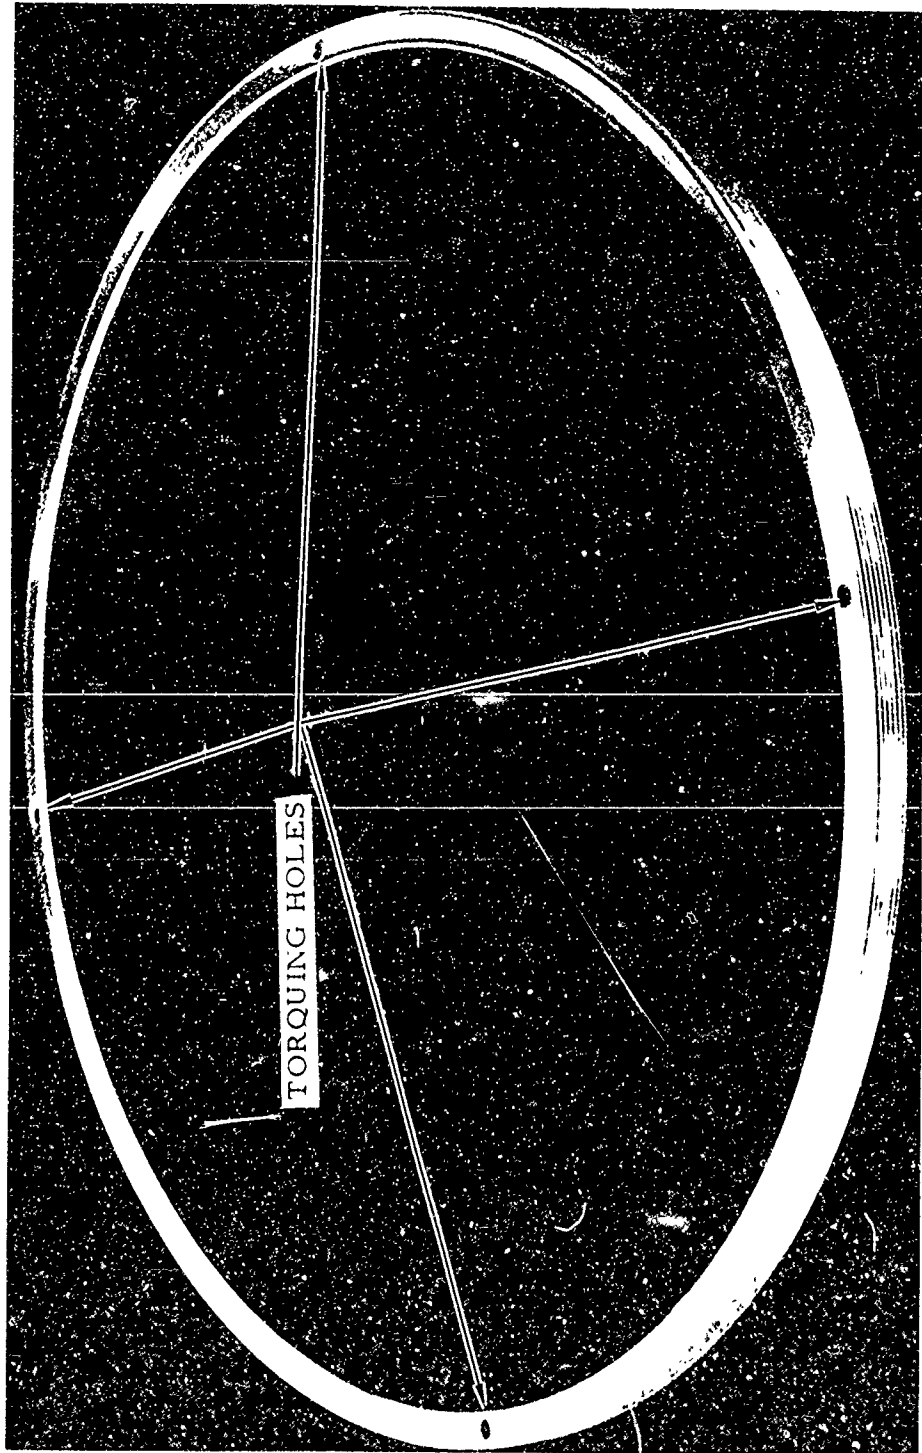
Typical Solar Cell Plaque Retaining Ring
